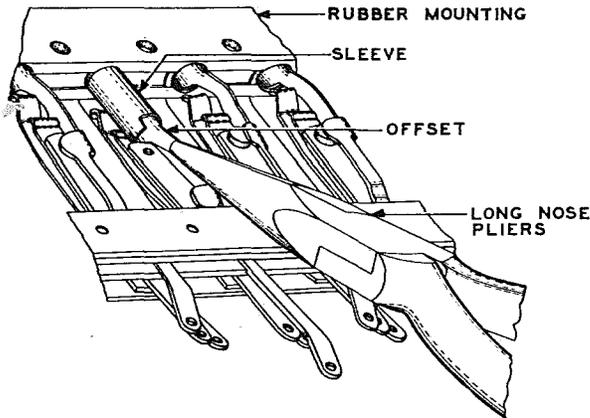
Method of Forcing Sleeve Forward into Rubber Mounting
